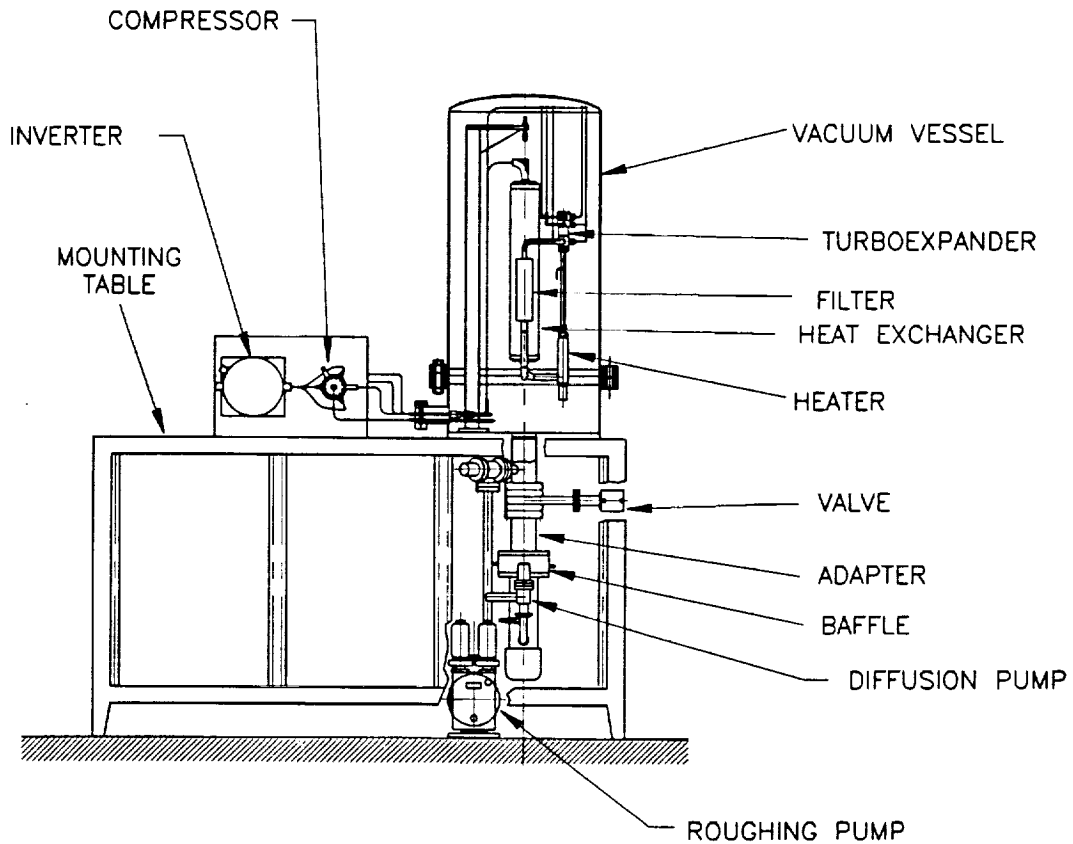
Preliminary Design of Engineering Model Cryocooler
